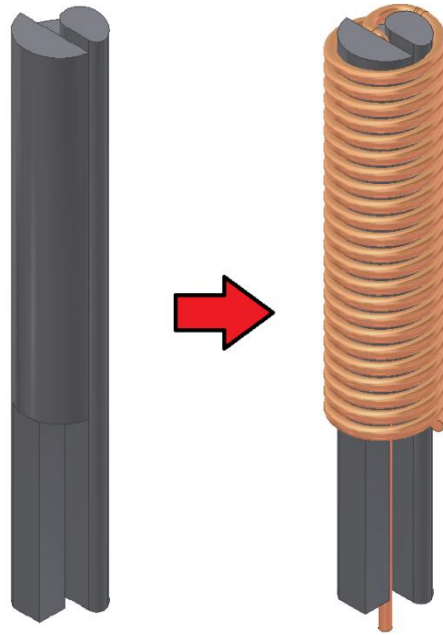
Winding tool and demonstration of helical coil winding for the manufacture of a 112 mm solenoid.
